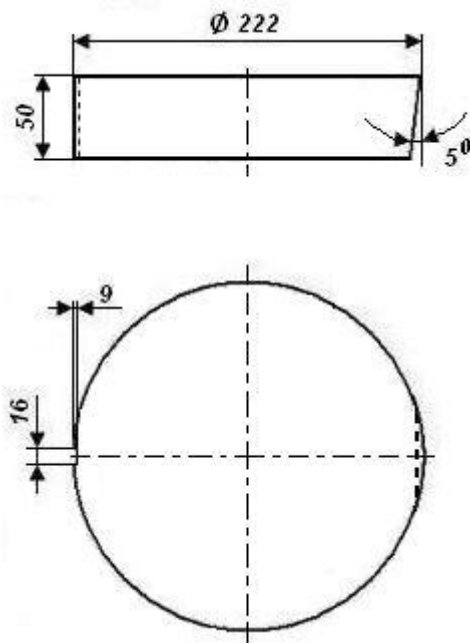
Technical Drawing of the Circular Die Housings of the Die Holder of the Forging Press [20]
